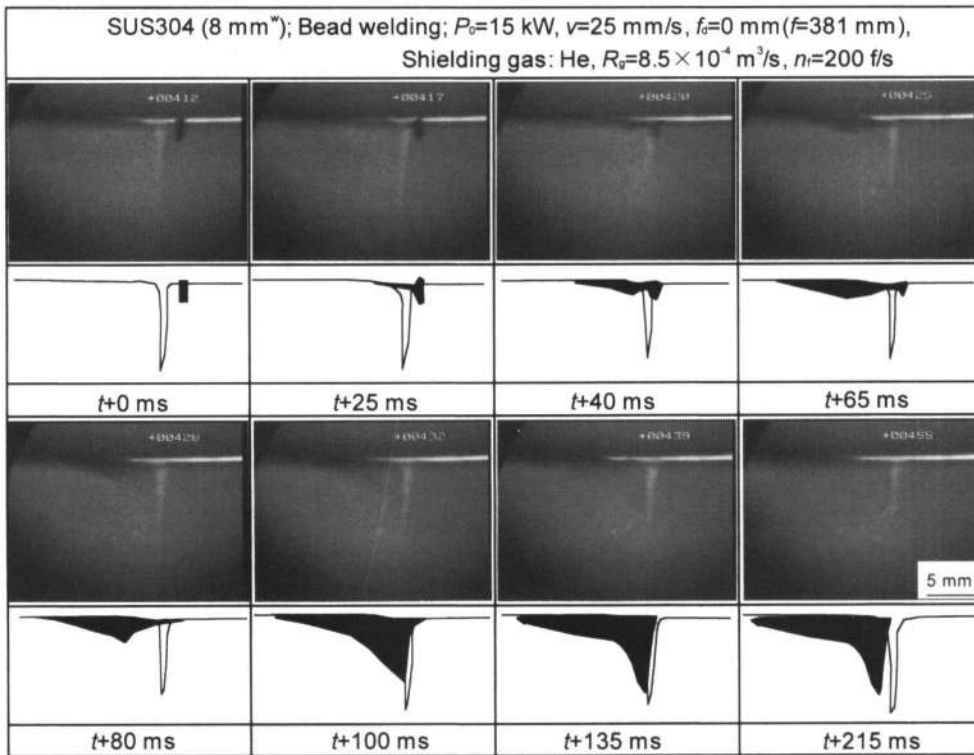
X-ray transmission images and their schematic drawing during CO₂ laser welding of Type 304 steel plate using Pt wire, showing spread of Pt melting to define weld pool geometry.
